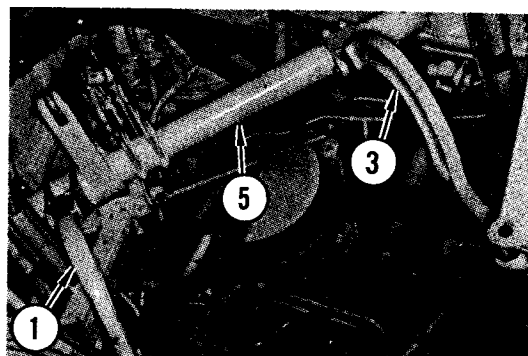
B. Main Landing Gear Door Adjustment (Sheet 2)
